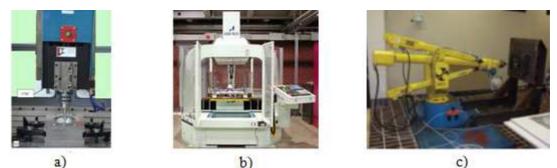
Use of equipment in the incremental process. a) Milling Center [8]; b) Specific for the process [9]; c) Robot [10].
